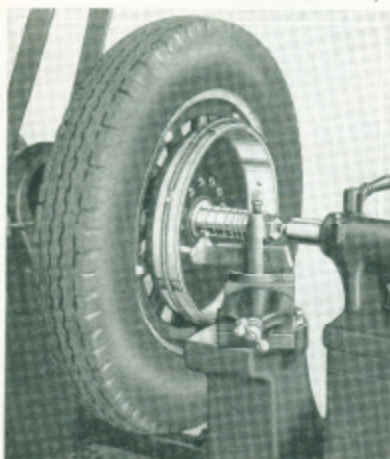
Truing an internal brake drum mounted on a straight mandrel with universal bearing adapters mounted between centers on the lathe. Drum size 17\"
